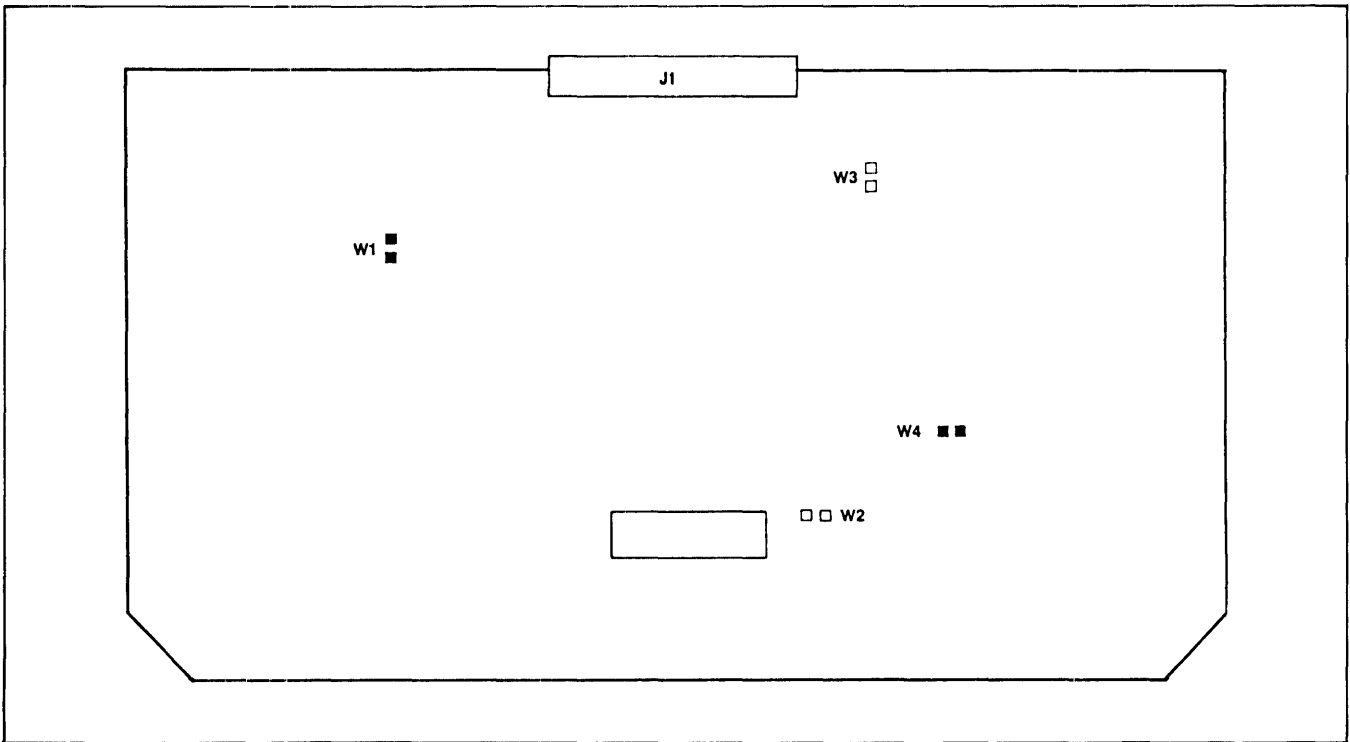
Jumper Locations for PCB Assembly 200514-1/200515-1
